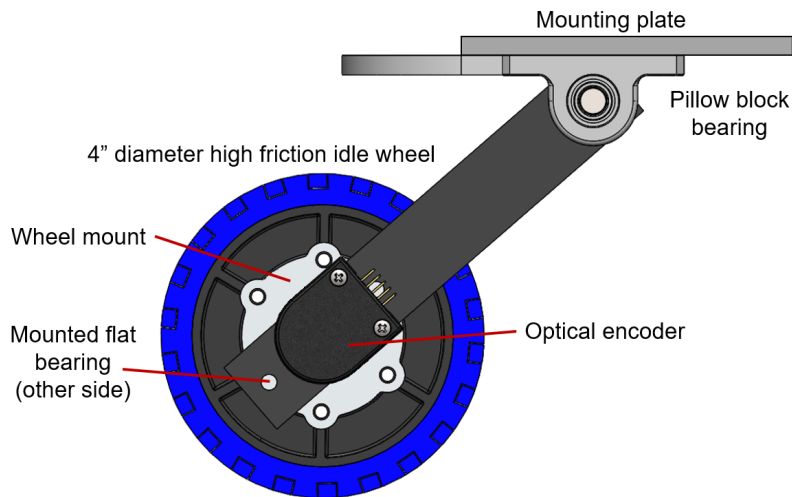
Side view of fifth wheel assembly CAD with key components labeled.
